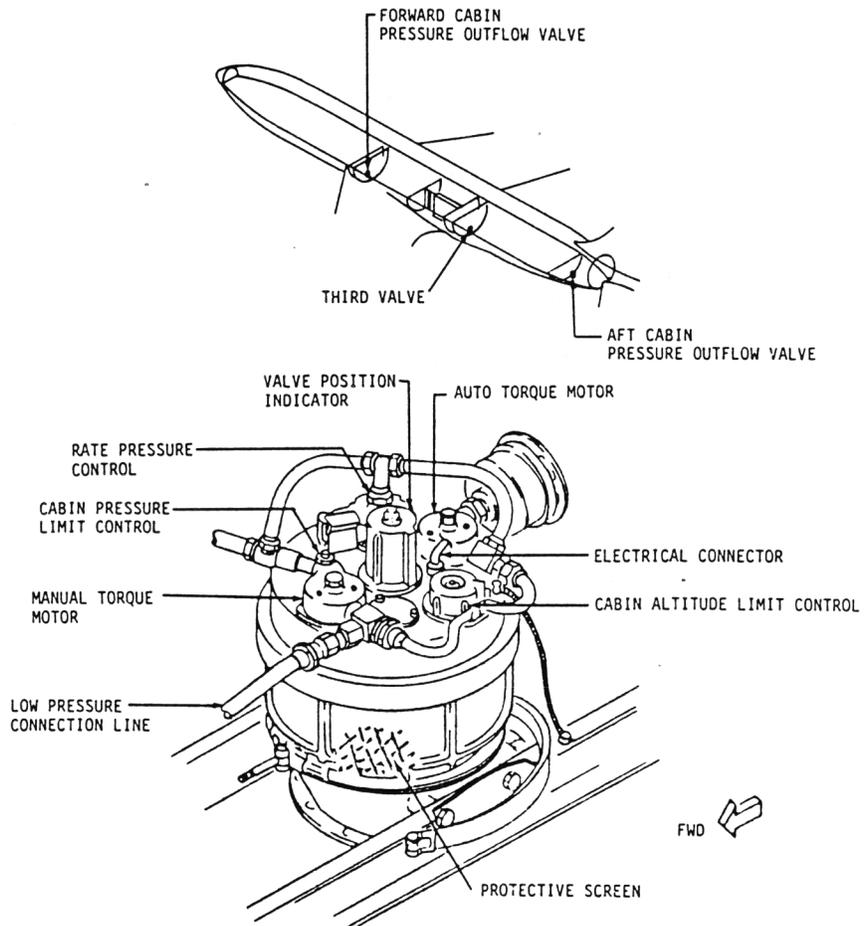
BOEING 707,720 CABIN PRESSURE OUTFLOW VALVE
